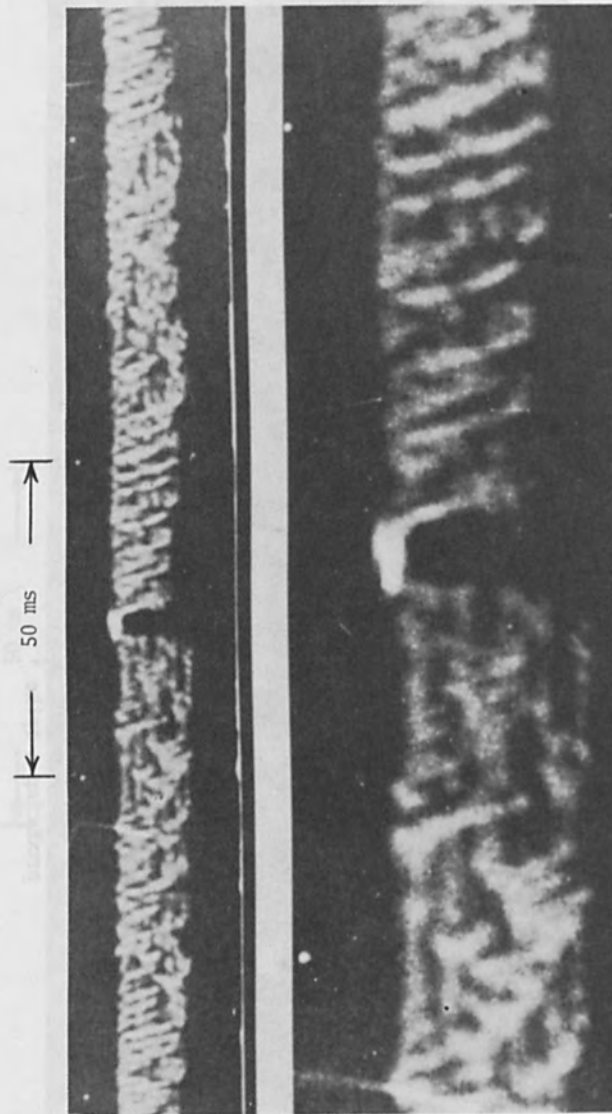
X-ray exposure and enlargement of a weld (126 kv, 10 ma, 21 ipm) on 7075 aluminum showing closure activity and a temporary blockage at the cavity top.
